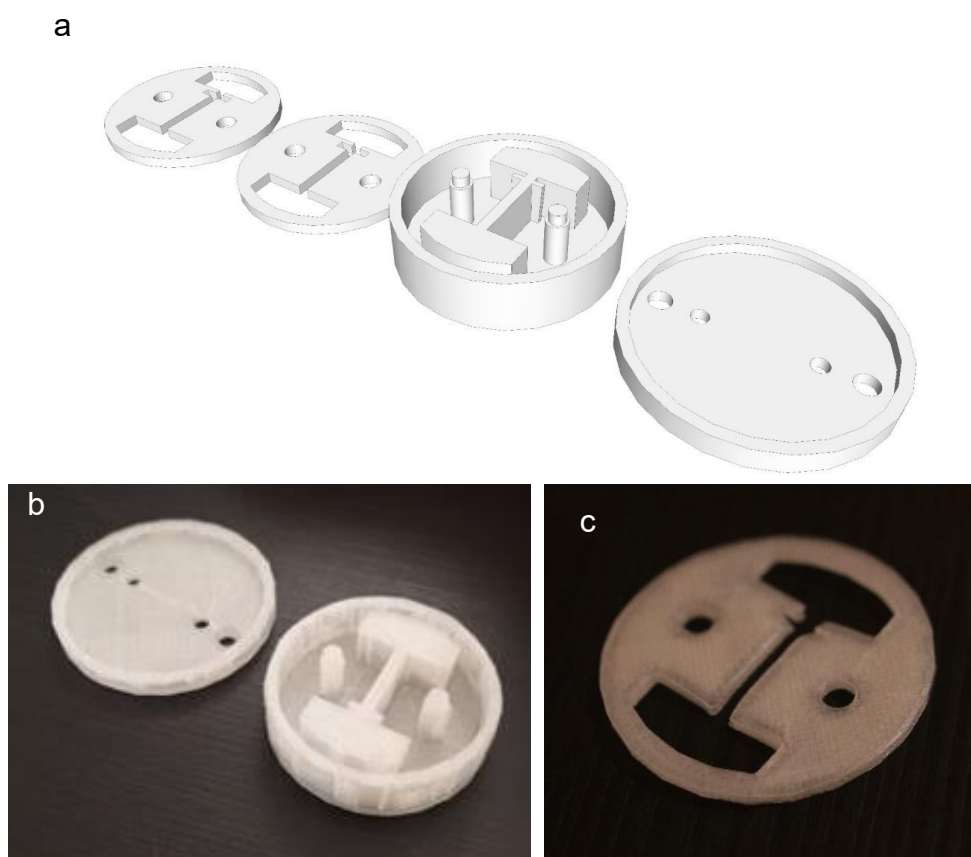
Third generation PLA mould, CAD and 3D printed PLA mould. a) CAD design created in Google Sketch Up (64 bit) 2017 for the third generation PLA mould. b) 3D printed PLA mould printed using Ultimaker 3 extended. c) 3D printed fourth generation PLA topper. Results representative of the production of 3 printed PLA moulds and topper that were all tested for fluid leakage.
